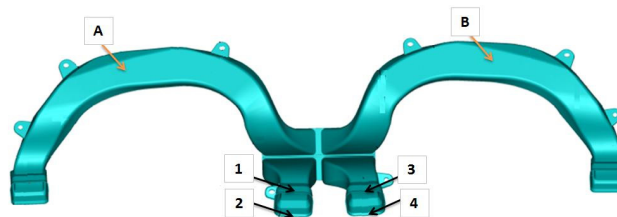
The critical measurement points which should be saved referred dimensional tolerances
